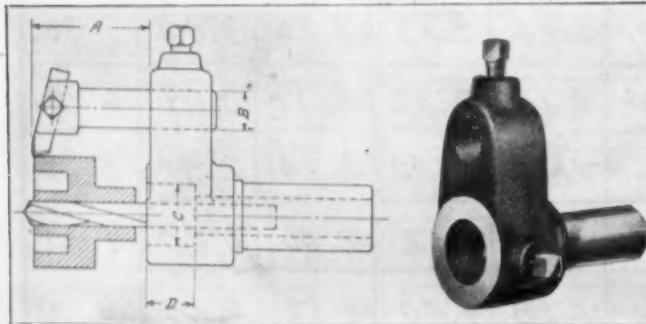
A PLAIN INSIDE AND OUTSIDE TOOL.
